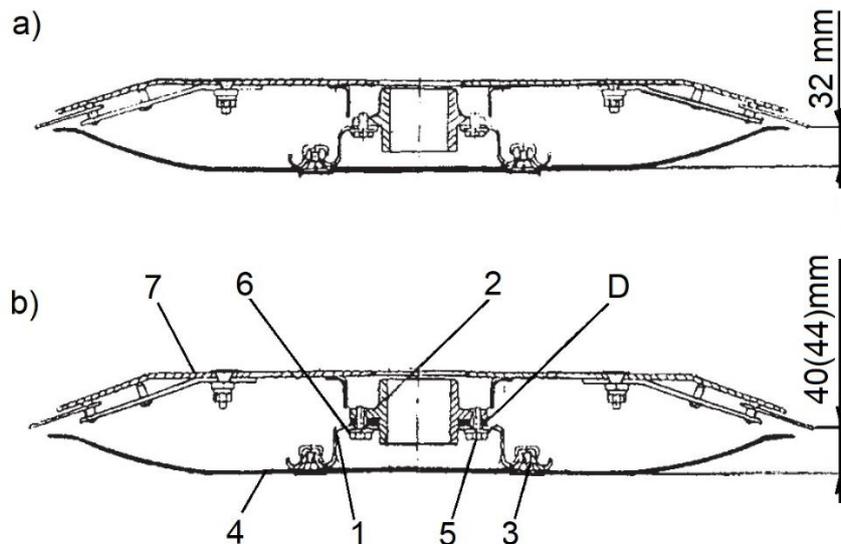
Using various mowing heights: a) - low 32 mm (without spacer ring D), b) - medium 40 mm with mounted spacer ring D of 8 mm in thickness or (44 mm) with mounted spacer ring D of 12 mm in thickness; 1 - resistance disc, 2 - hub, 3 - special bolt M12 x 25, 4 - sliding disc, 5 - bolt M10 x 30, 6 - tab washer, 7 - resistance disc.
